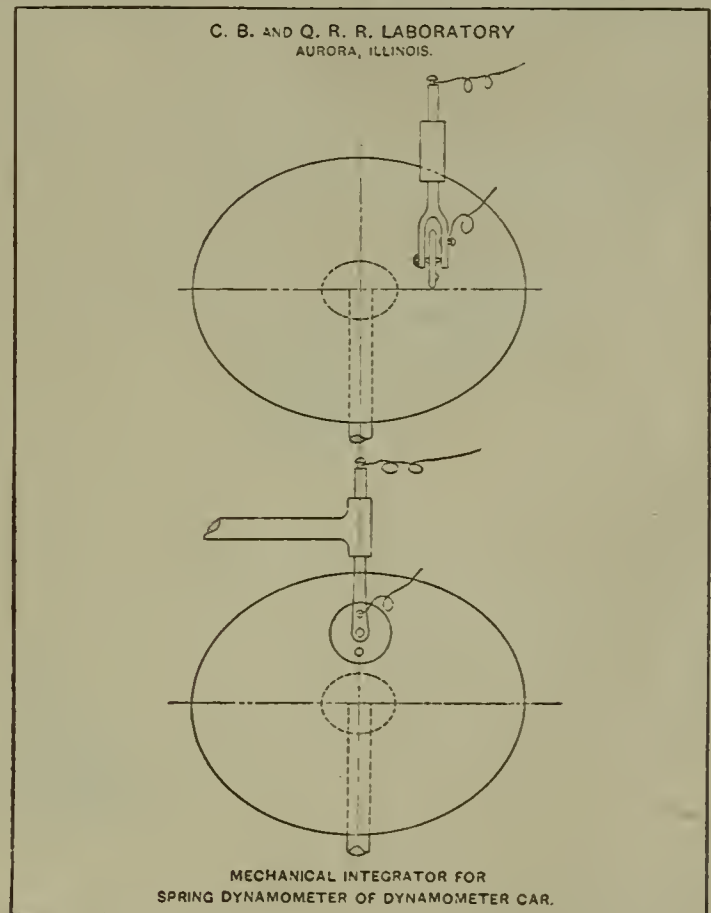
MECHANICAL INTEGRATOR FOR SPRING DYNAMOMETER.
